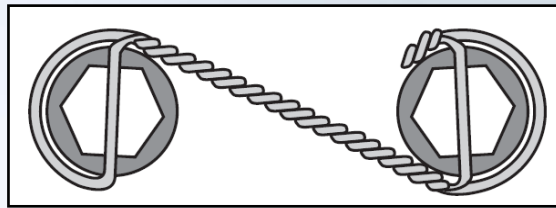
Safety Wiring (Double-Twist, Right-Hand Threads)
